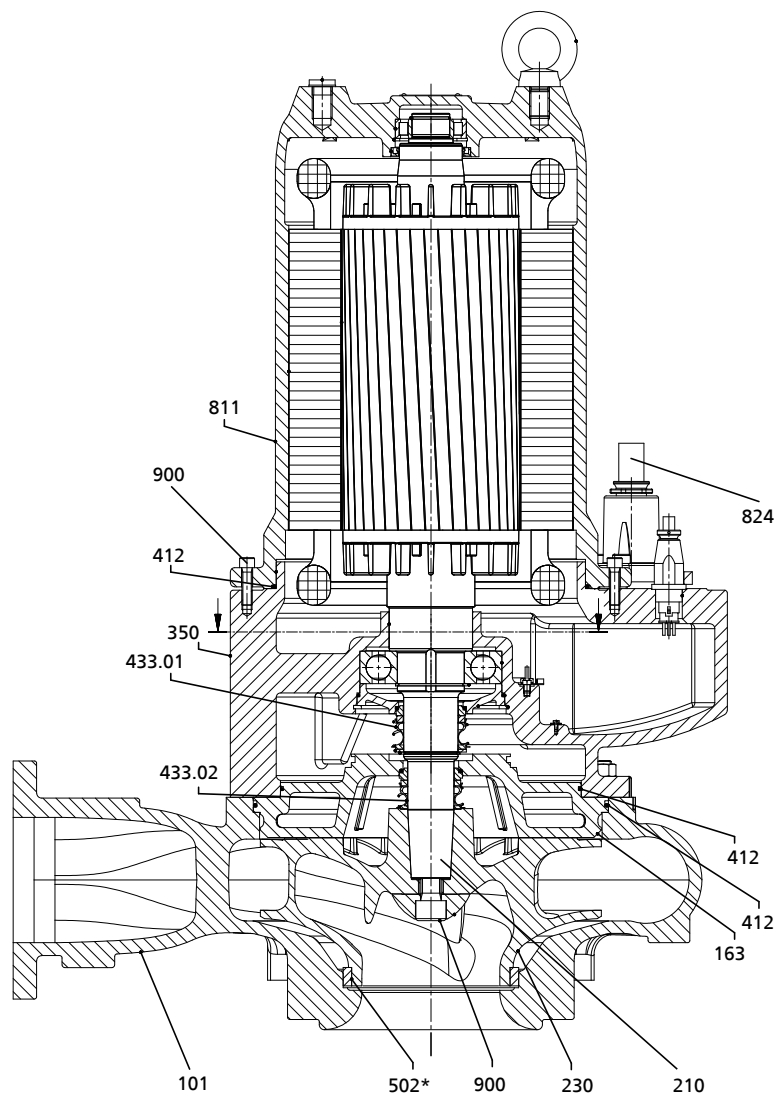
General assembly drawing, example: Amarex KRT E/K 100-400/75 4 XEG
